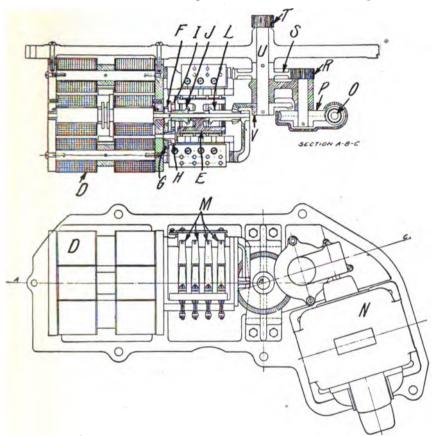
Assembly of Horizontal Training Mechanism of 36" E. C. Projector.
